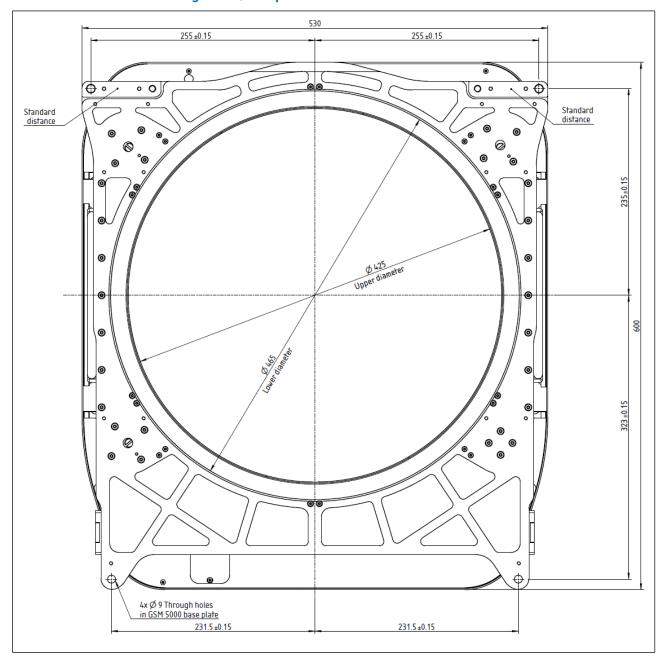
Dimensions of fastening holes and footprint of the standard installation
